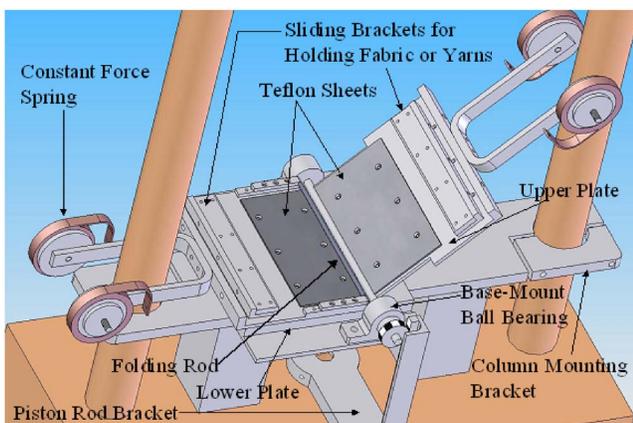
Basic design of folding device attached to servohydraulic machine. Constant force springs attach to sliding brackets using 0.635 cm dia stainless steel rods (not shown). Note: Delrin brace on piston rod bracket removed to better show clamshell design.
